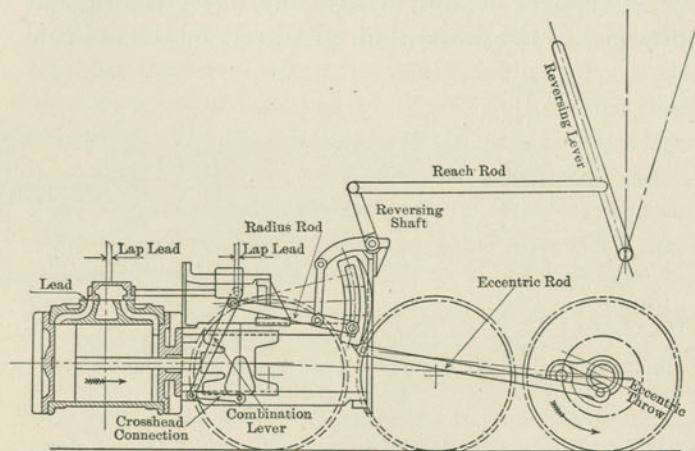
Walschaerts' Valve-gear Used by Baldwin Locomotive Works
